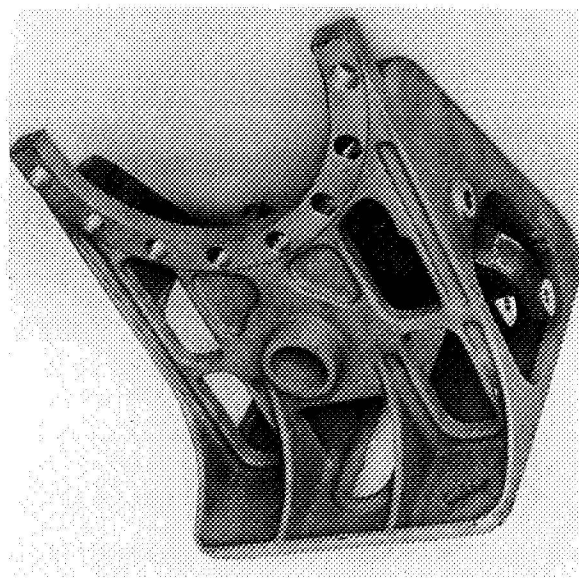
Propellant line bracket assembly, M-45 alloy.
